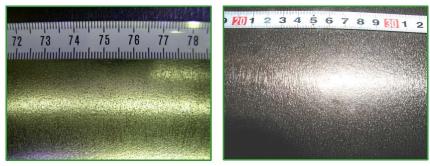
Barrel surface after rolling 2530t low alloy carbon steel in stand F4 of a 7-stand CSP mill (left) or after rolling a double campaign 4000t low alloy carbon steel in stand F3 of a 6-stand HSM (right)
